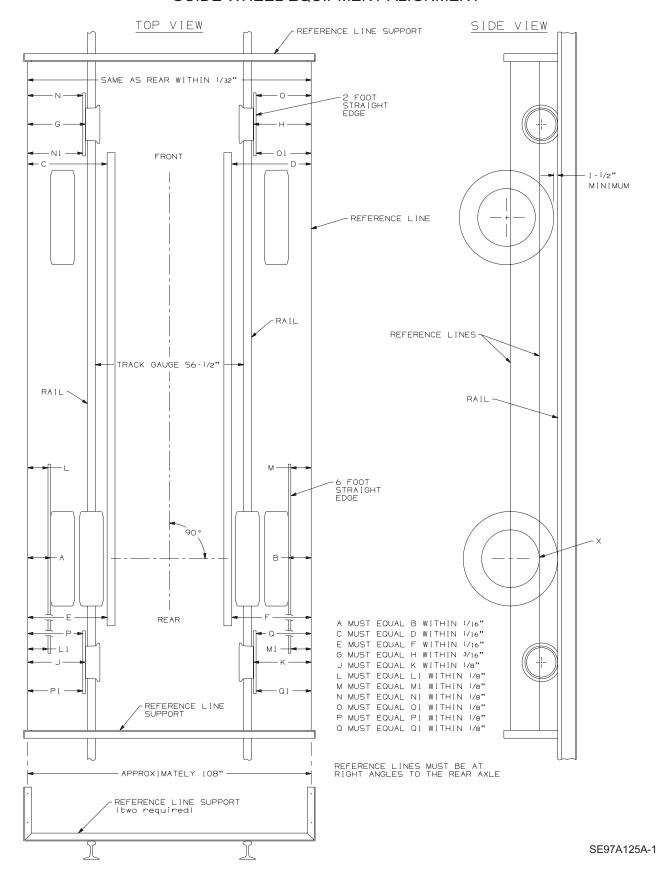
GUIDE WHEEL EQUIPMENT ALIGNMENT
